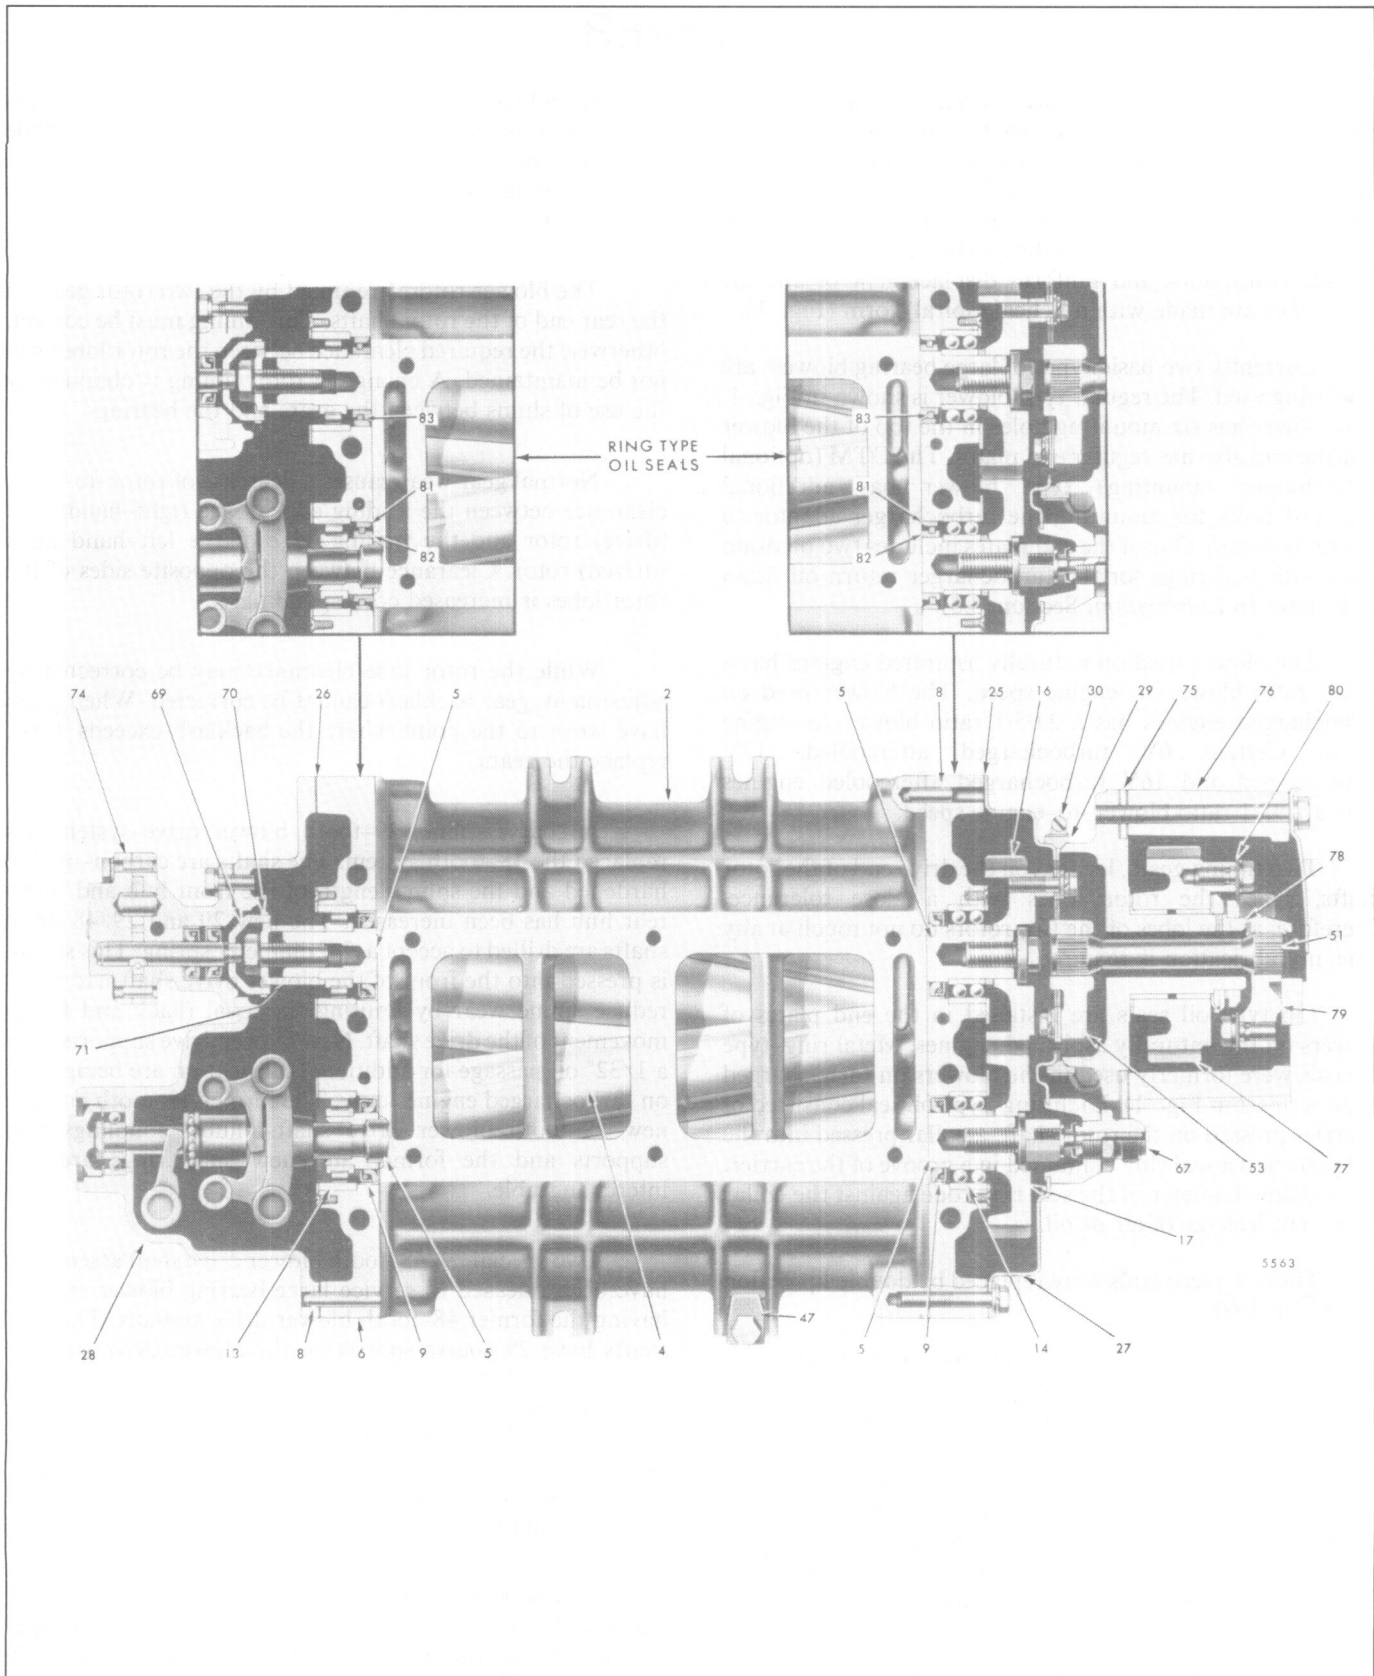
Blower and Drive Assembly and Accessories Attached to Blower
